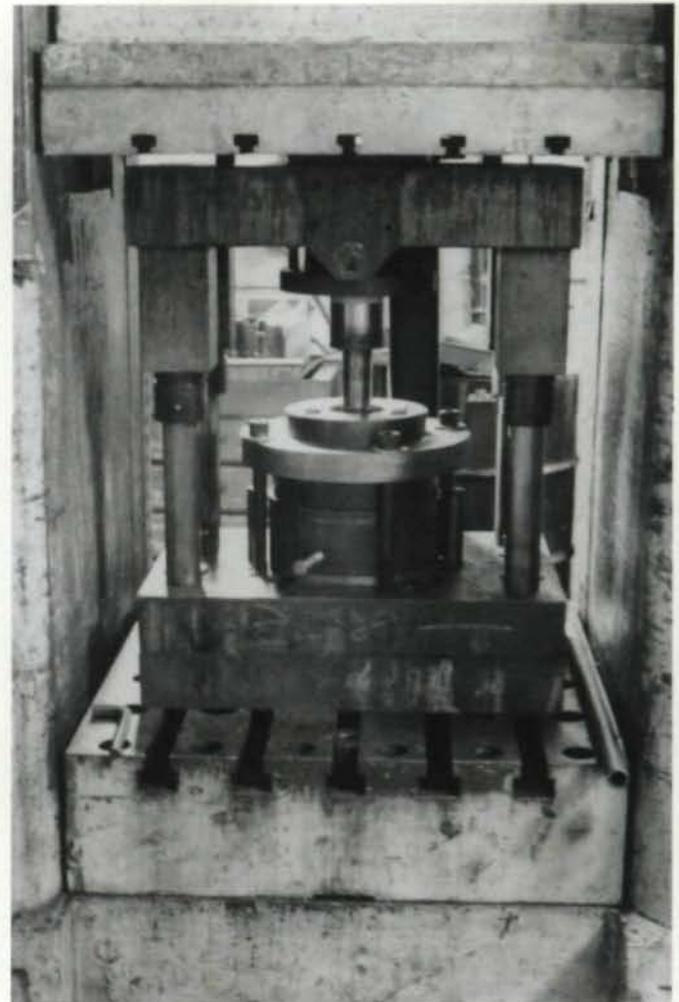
Tool Setup for Spur Gear Extrusion Trials
